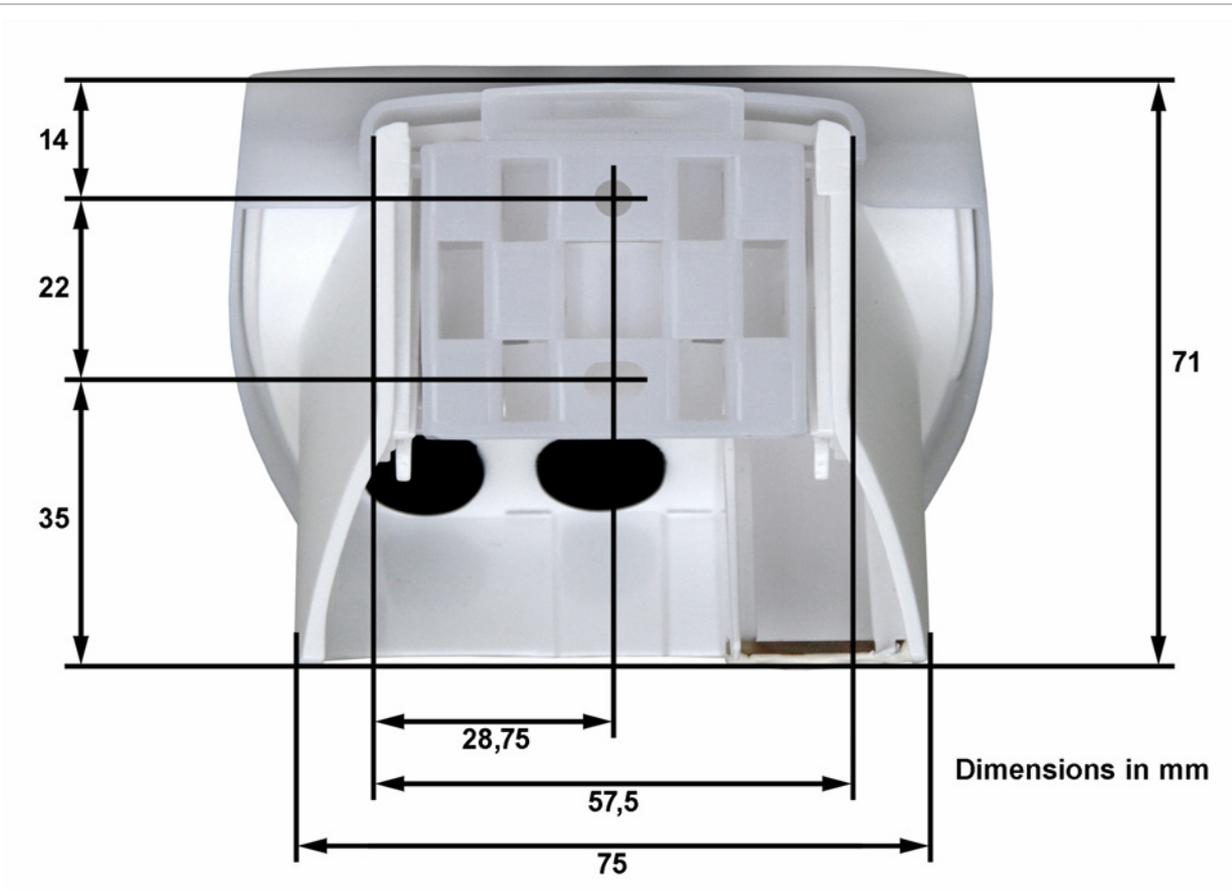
a: Dimensions of rear side of housing with bracket. Subject to change for technical enhancement.
